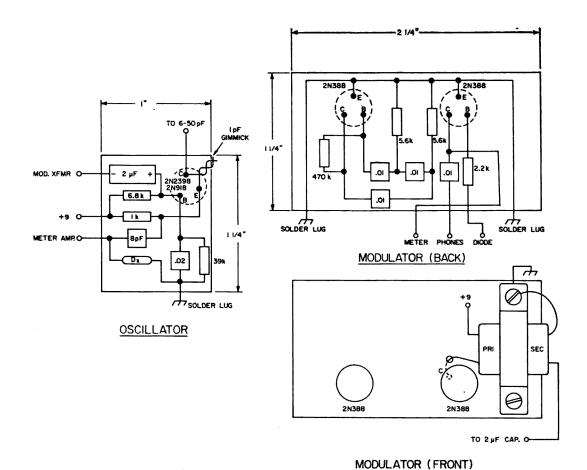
Layout of the two circuit boards used in the great dipper. Although two boards were used in this case, the circuit could be easily adapted to one board, and even to printed circuitry.
